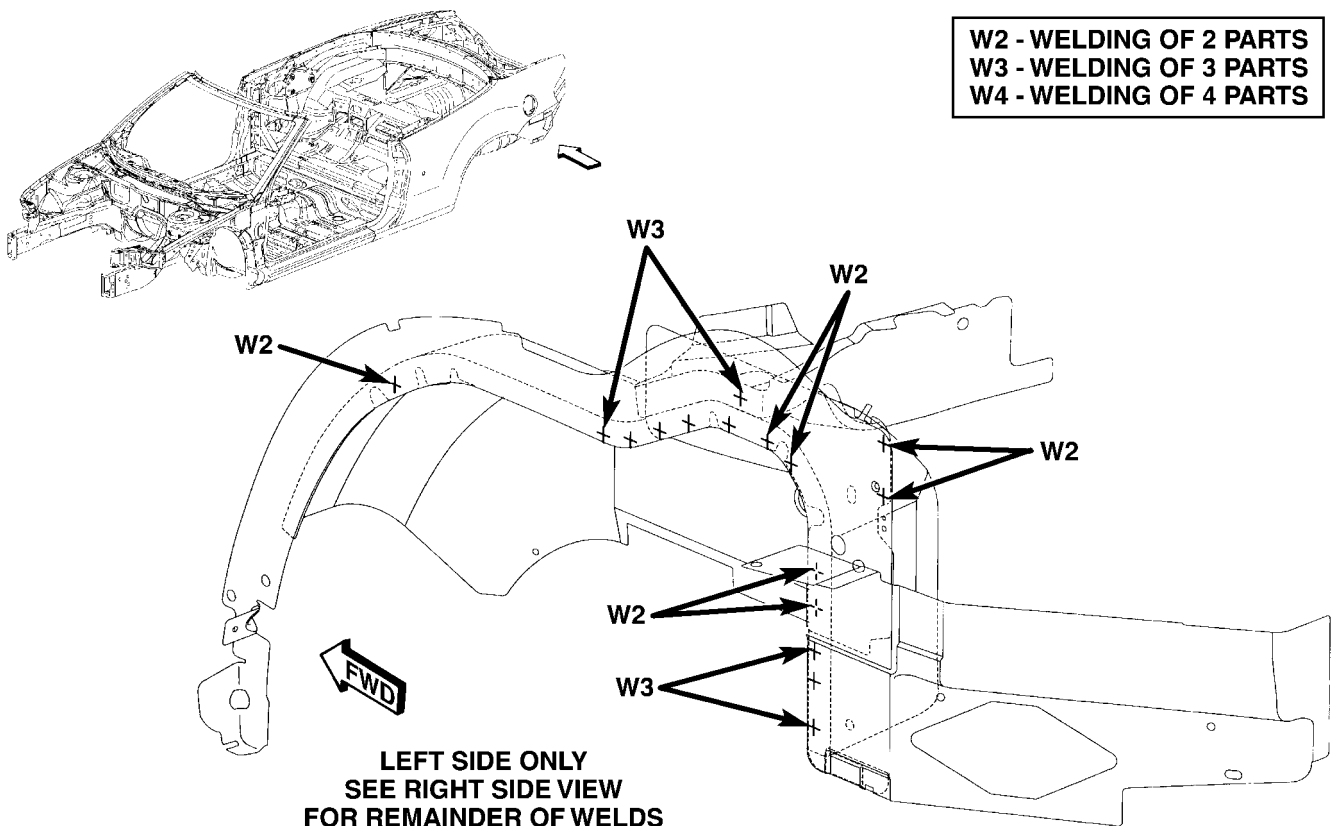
INNER BODY SIDE SILL TO OUTER BODY SIDE PANEL TO INNER SIDE SILL EXTENSION
